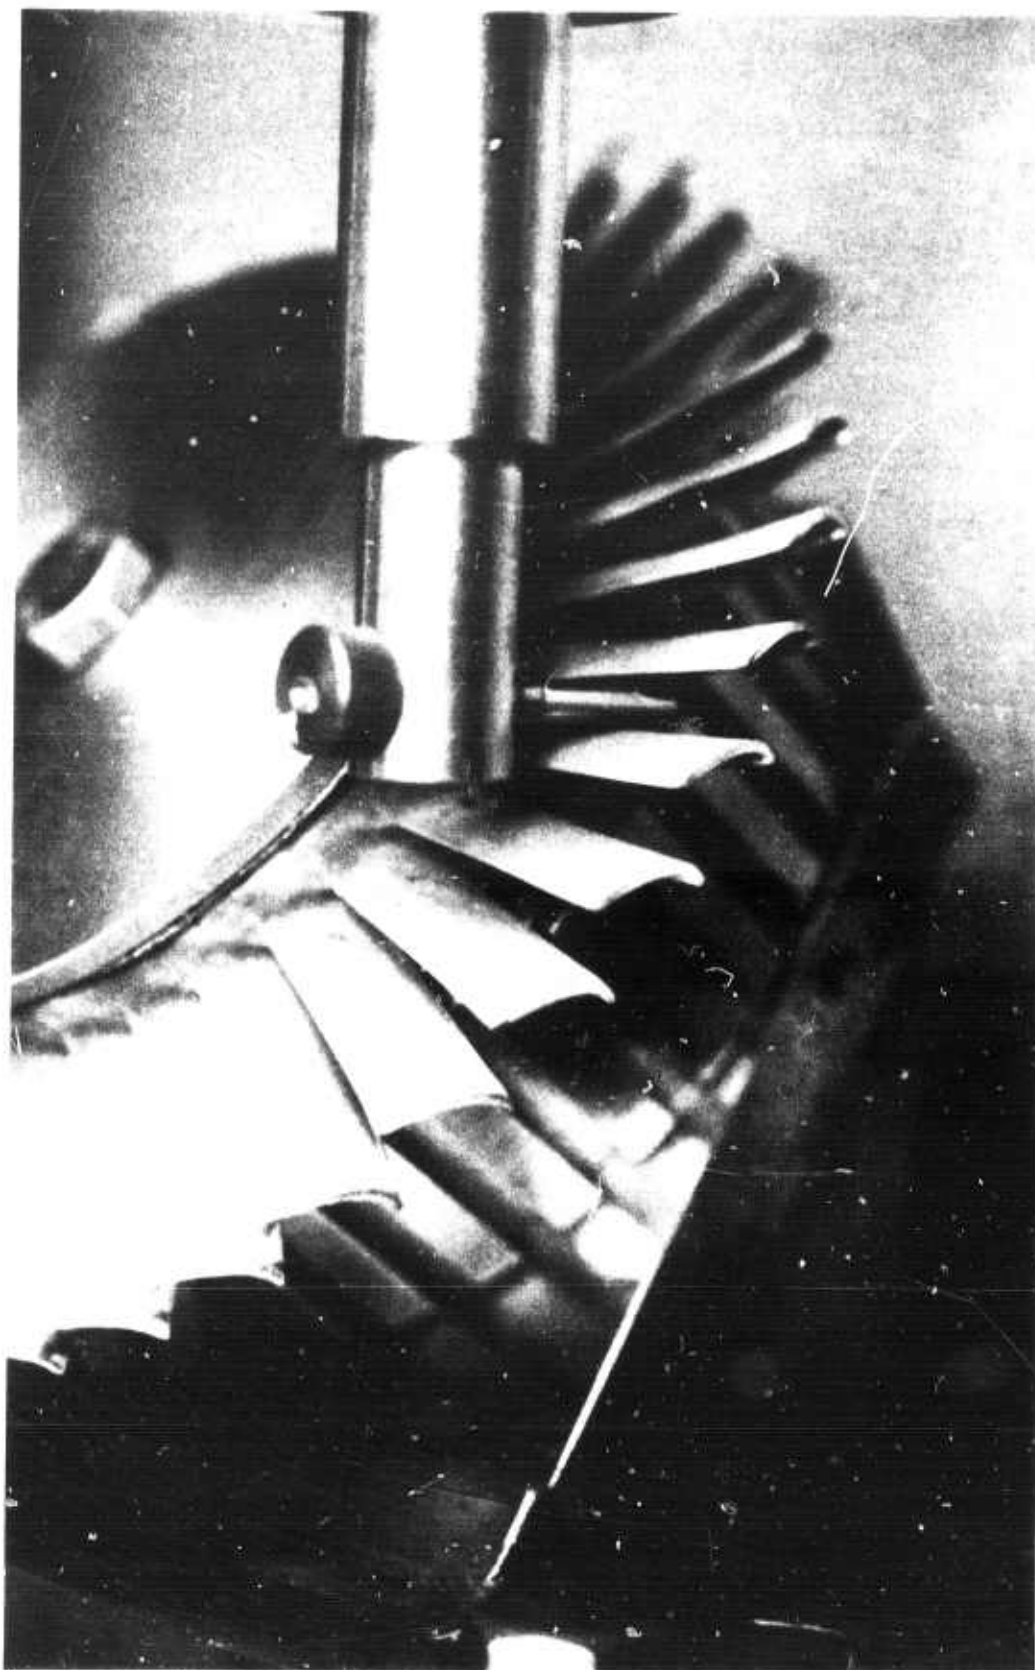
Revised Design D' Blade Bend Test Fixture.
